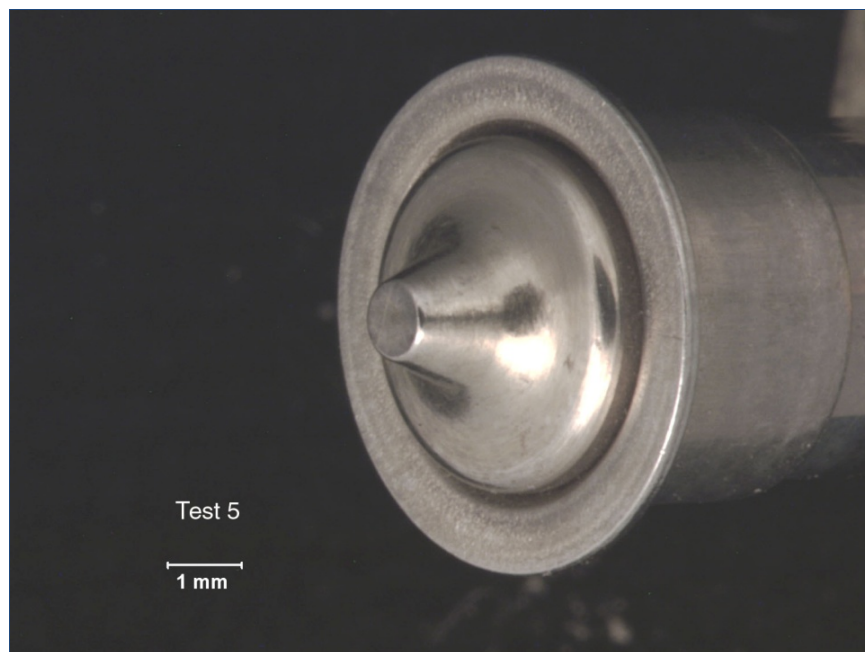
AF7938 50/50 JP-8/HRJ, Lower Hydraulic Coupler Piston
